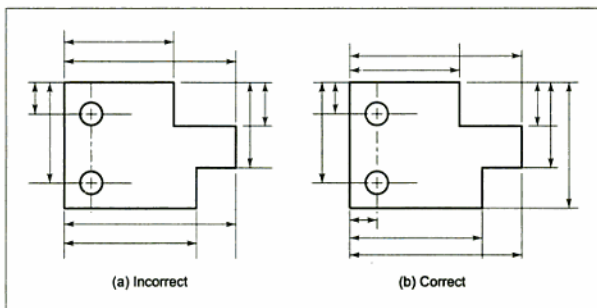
Avoid Crossing of Dimension and Extension Lines
